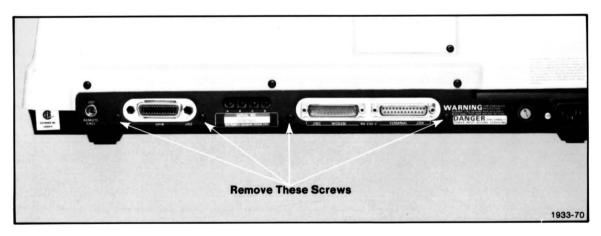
Rear Panel Circuit Board Screw Locations.
